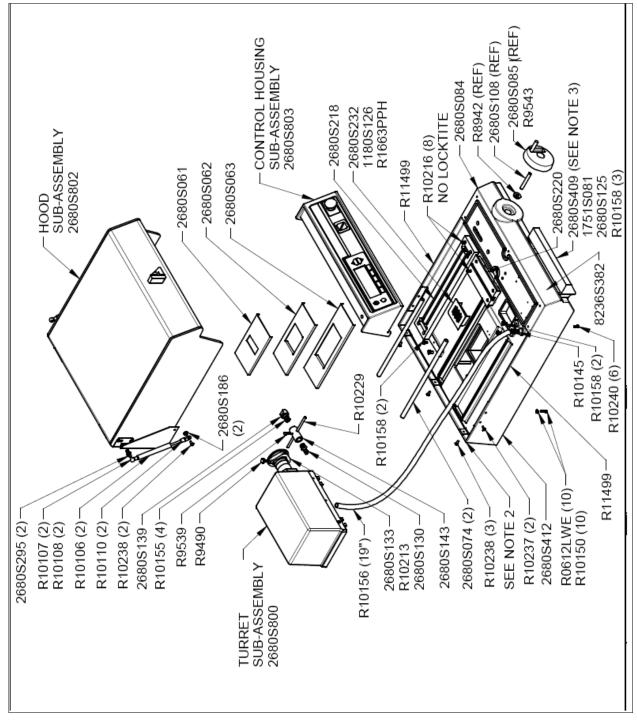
IsoMet 4000 Top View of Assembly Diagram (2680900B)
